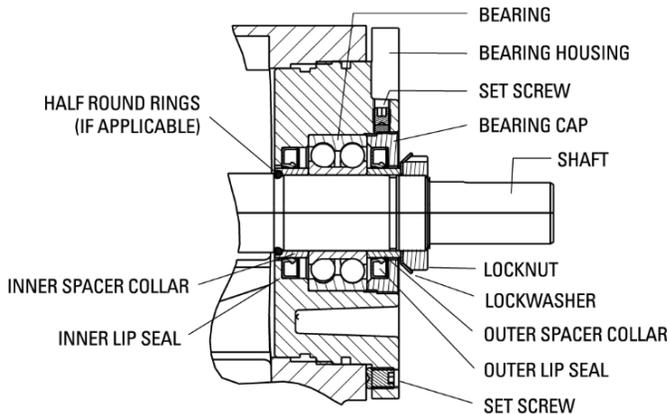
THROUGH G1-82 BEARING HOUSING ASSEMBLY
